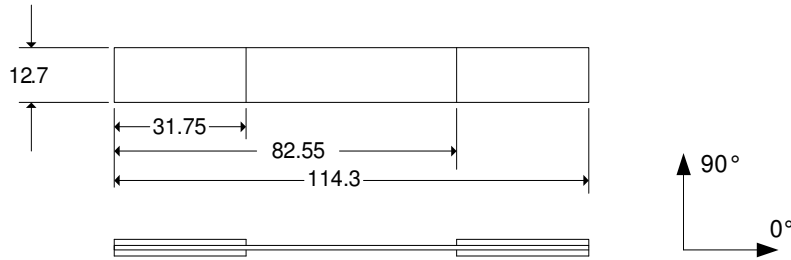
Tensile composite specimen geometry – Dimensions [mm].
